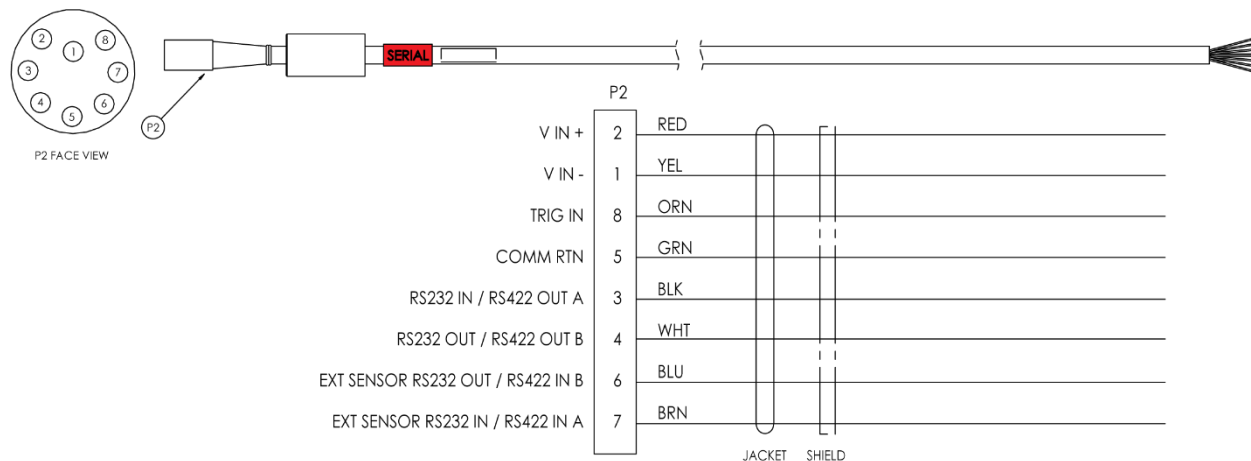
Serial Pigtail Power/Comm Cable A73-6001-xxx Wiring
